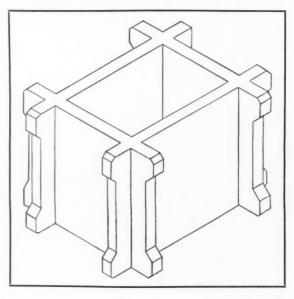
Drawing showing method of providing supports on cast iron drilling jig.
